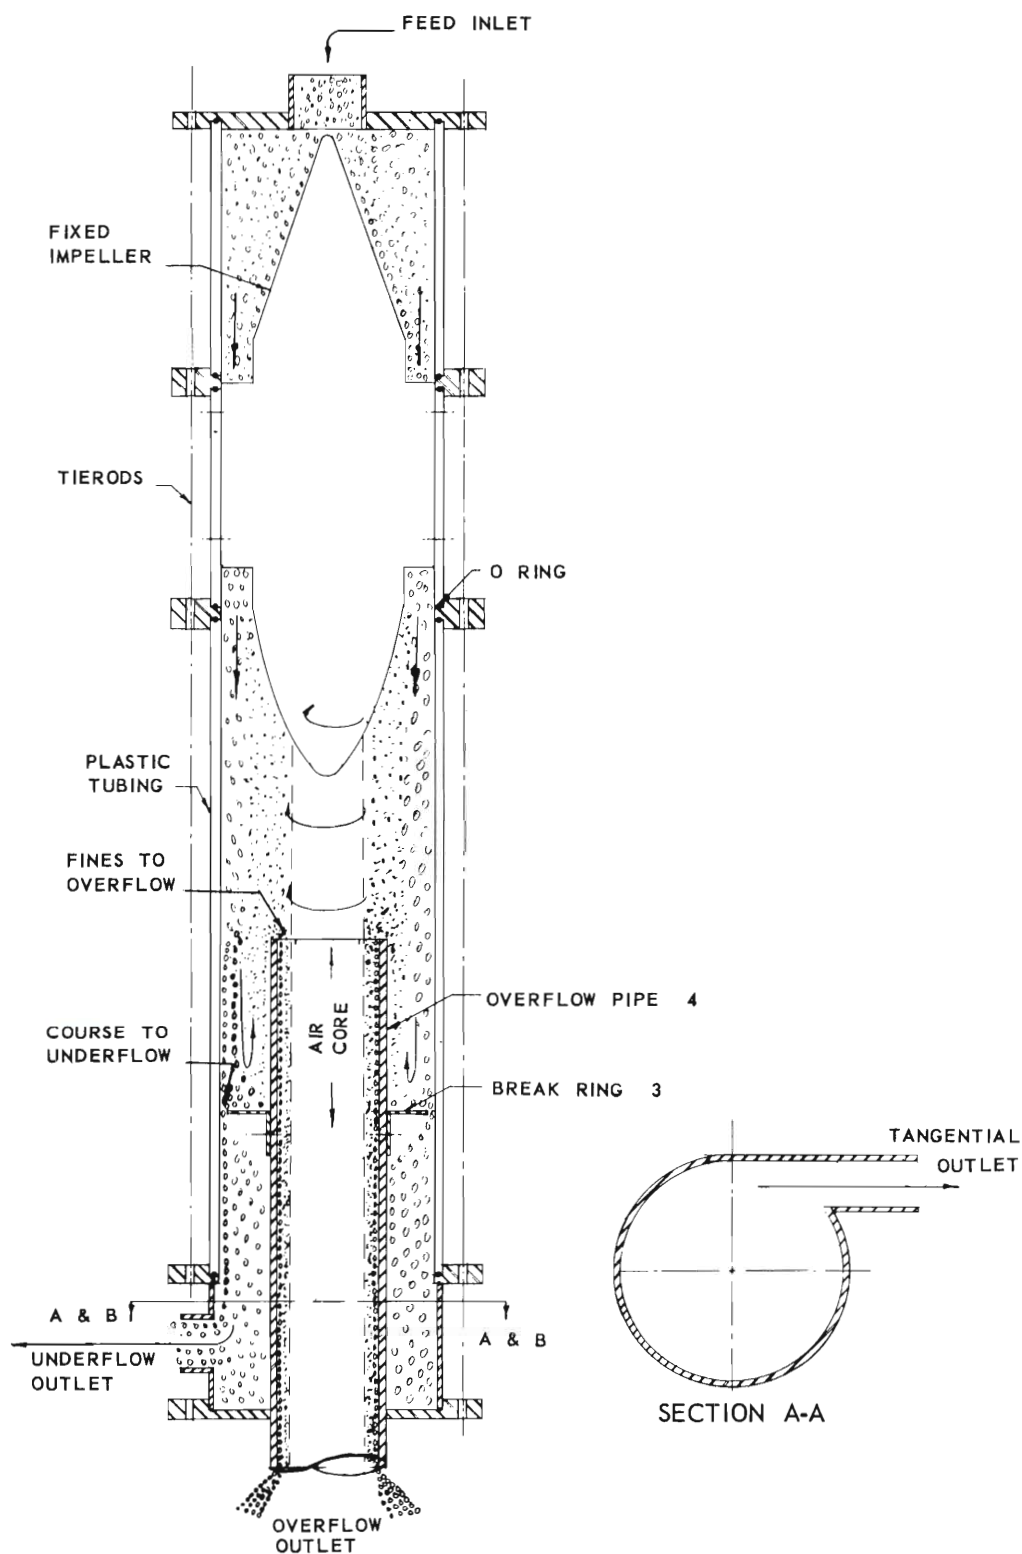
Assembly Drawing of 5-1/2-Inch Fixed-Impeller Separator.
